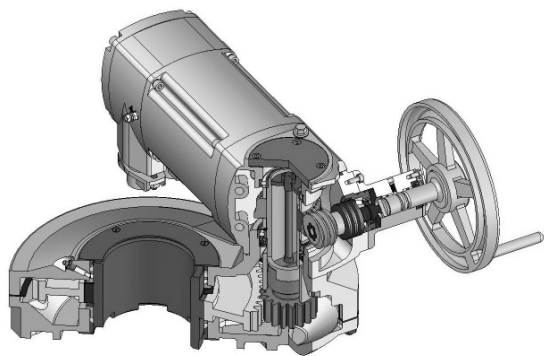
Overview of multi-turn electrical drive produced by AUMA (Germany) with power transmission of worm-cylinder type and perpendicular arrangement of crossed axes of engine rotor and valve spindle
